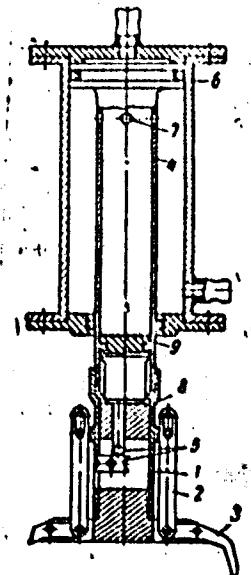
1 - grip casing; 2 - drawbar; 3 - grip hooks; 4 - shaft of the power cylinder; 5 - stopping device; 6 - power cylinder; 7 - opening; 8 - movable frame; 9 - plunger.
